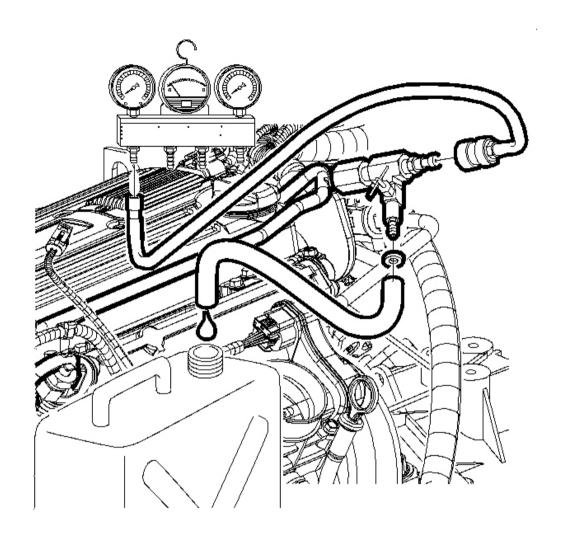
View Of Fuel Tank Drain Hose Courtesy of GENERAL MOTORS CORP.
